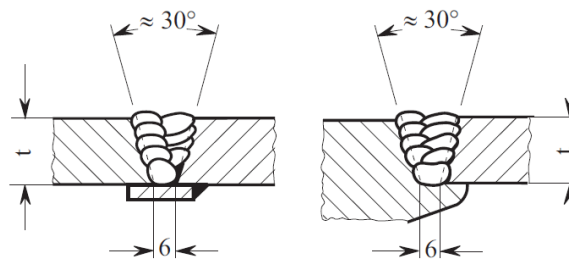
Single-side welds with permanent weld pool supports (backings)
